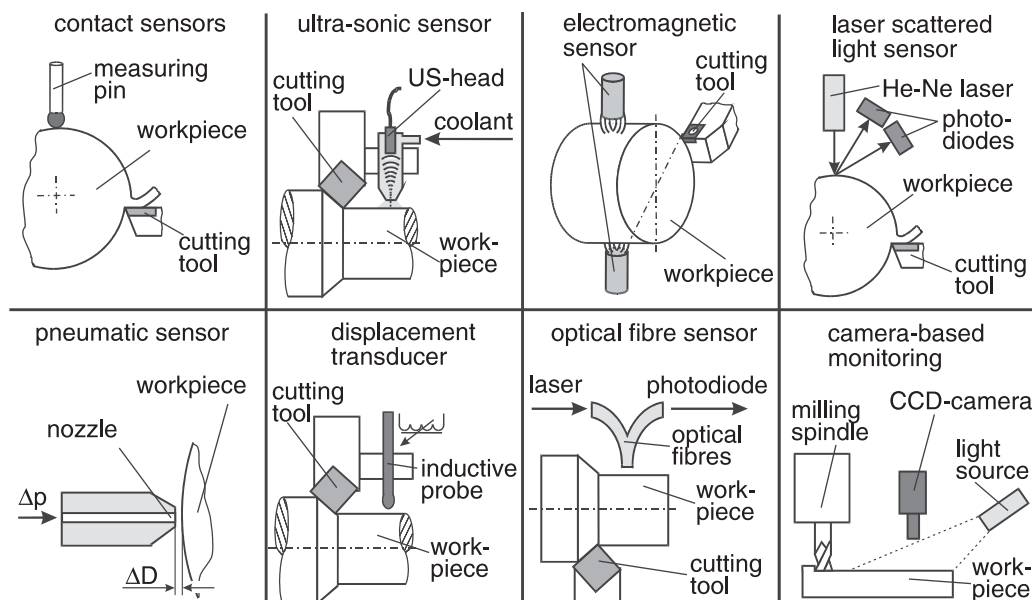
Workpiece sensors applied to cutting processes
